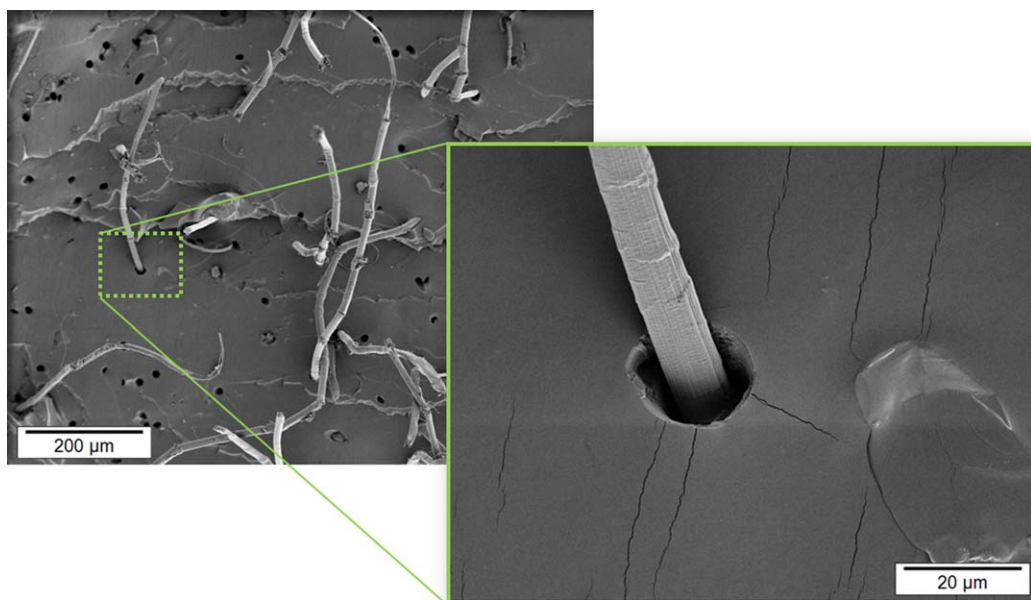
Surface of fractured tensile specimen with 5 phr incorporated by two roll mill with zoomed detail (fracture surface perpendicular to the milling direction y). [Color figure can be viewed in the online issue, which is available at wileyonlinelibrary.com.]
